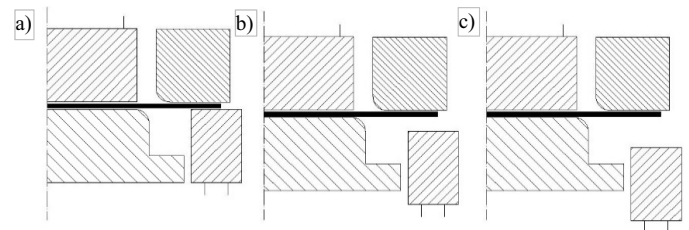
Configuration of tool positions – lower blankholder a) 31 mm, b) 21 mm, c) 11 mm
